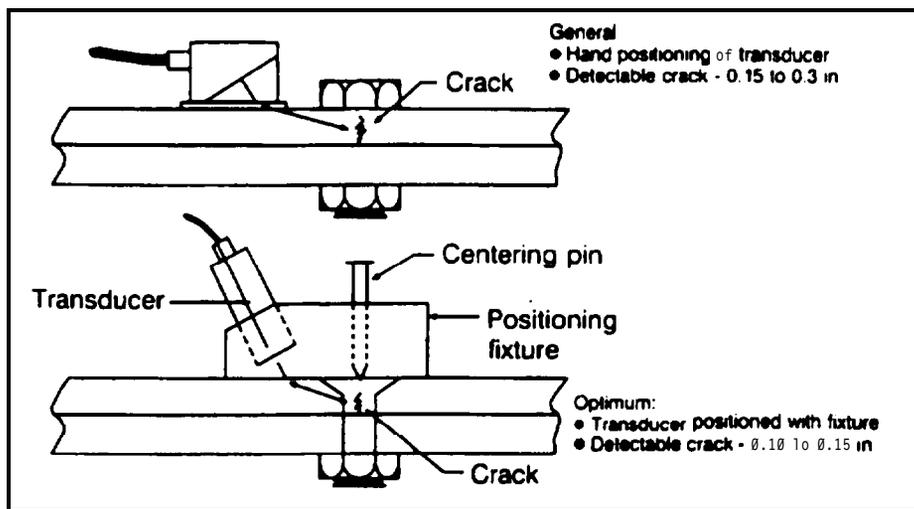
Example of the use of a transducer positioning fixture.
